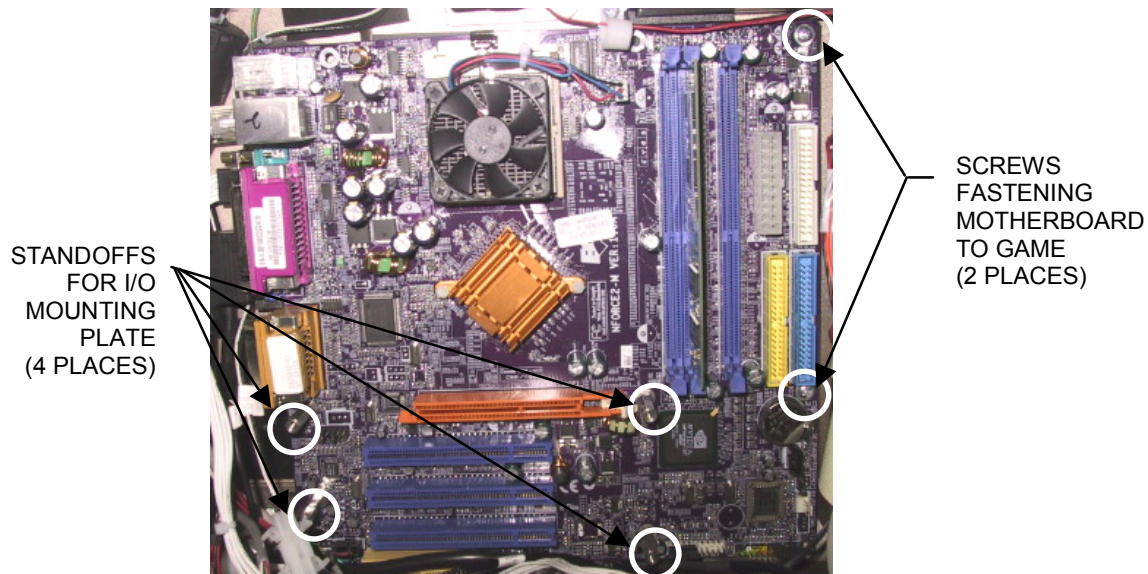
ECS MOTHERBOARD ASSEMBLY
